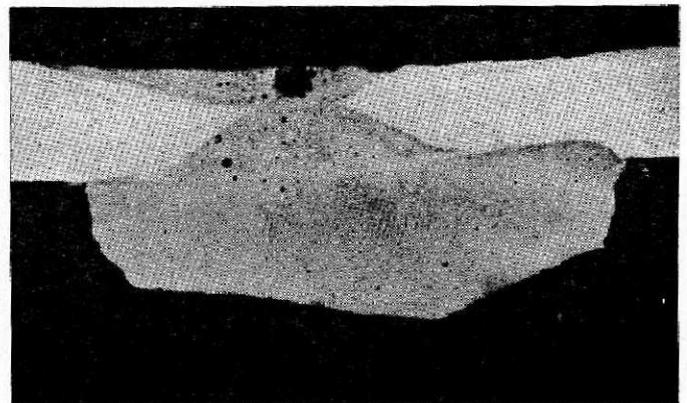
(8907) — UNSOUNDNESS, WITH RESULTANT PITTING, IN MONEL WELD METAL ($\times 10$)
